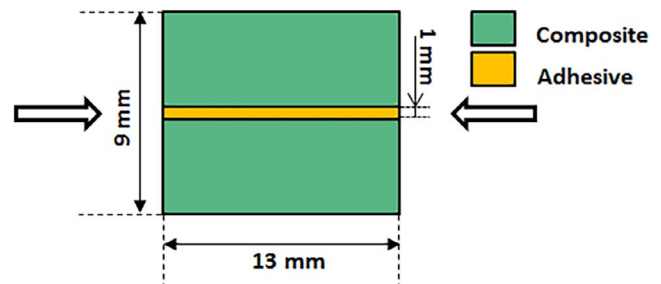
Adhesively-bonded composite joints specimen subjected to in-plane loading.
